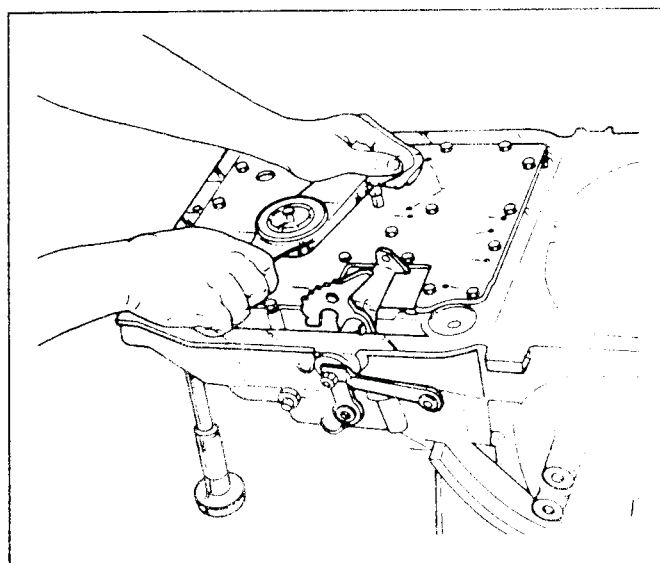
Tighten T82P-7006-C Cap Screws—AOD
